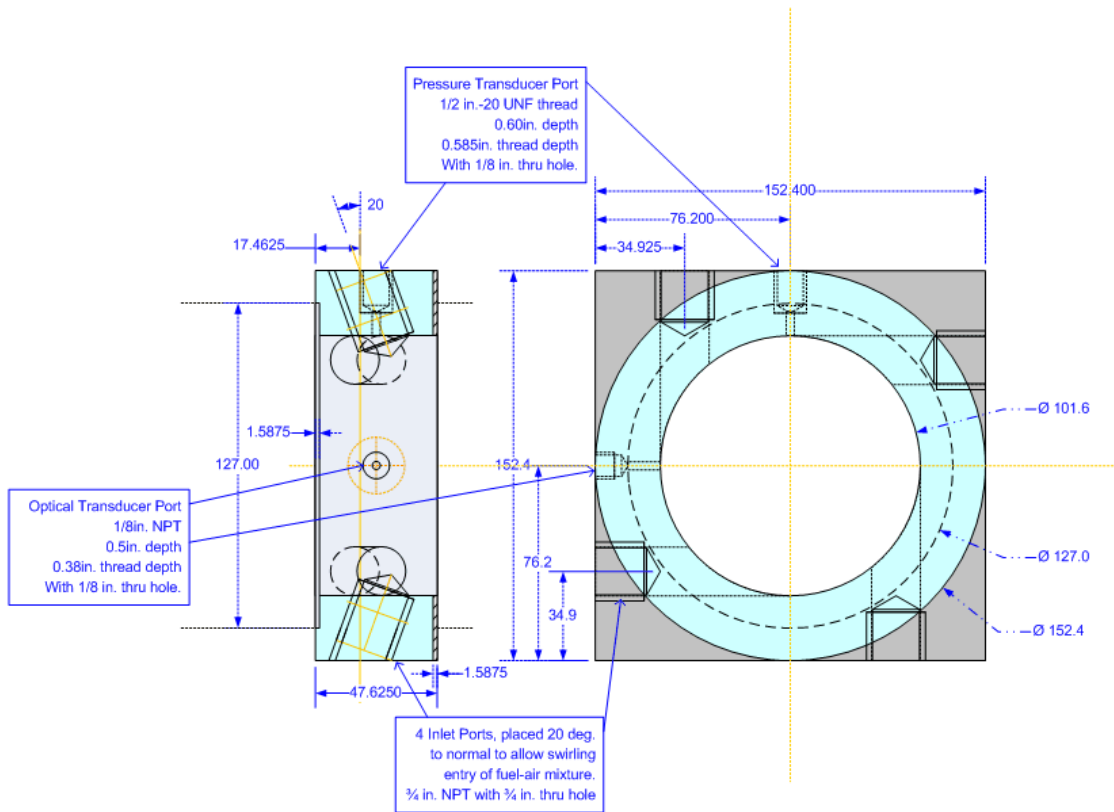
Schematic of the swirl injector block. All dimensions indicated are in millimeters.
